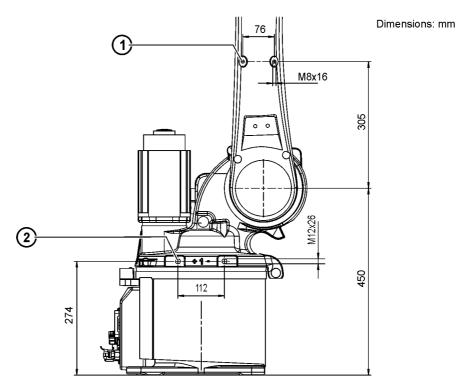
Fastening the supplementary load, link arm/rotating column
